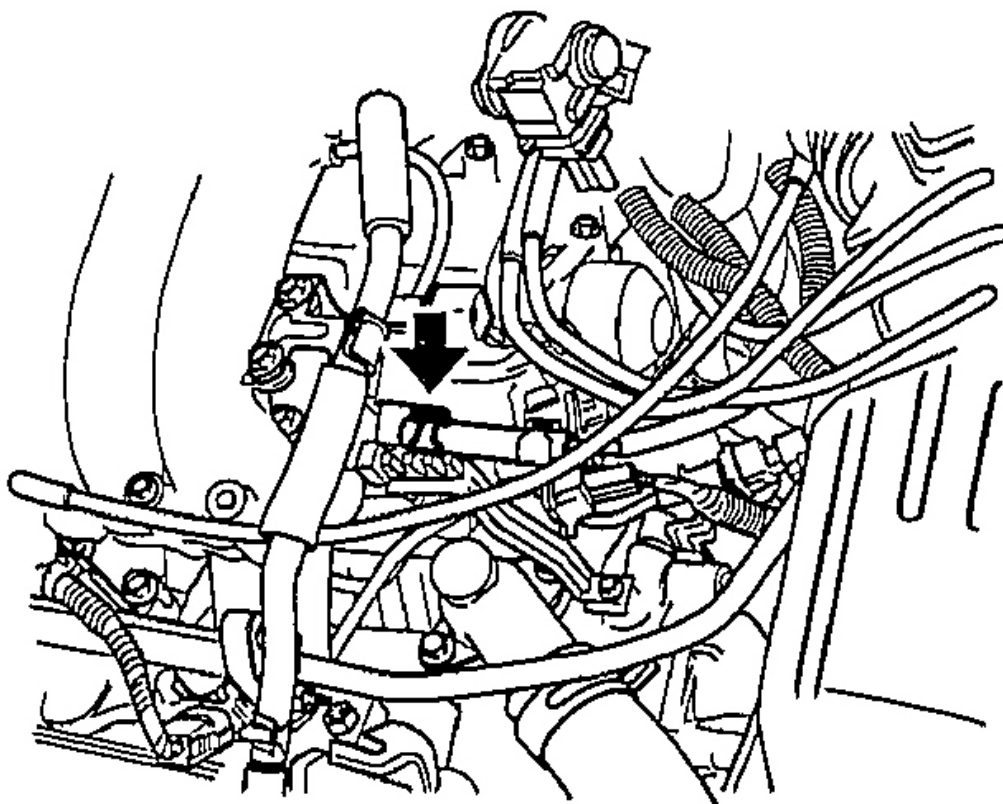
Identifying Surge Tank Stays (Engine Right Front View)
